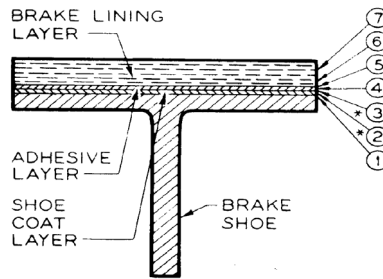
STANDARD LAYERS TO ASSESS BOND FRACTURE
